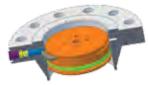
SureLoc[™] Flange with a SureLoc[™] Blind Plug
